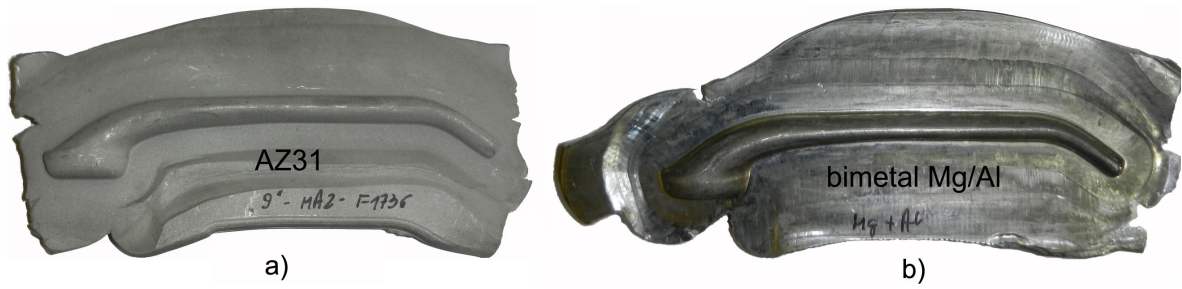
A view of the forged door handles with a visible flash: a) the AZ31 alloy forging, b) the Mg/Al bimetallic forging
